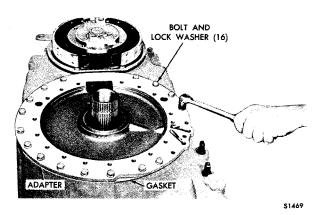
Installing rear housing adapter bolts (-1 model)
